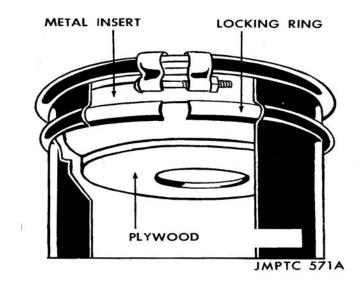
Cup-type insert locked in place (MIL-D-6054).
